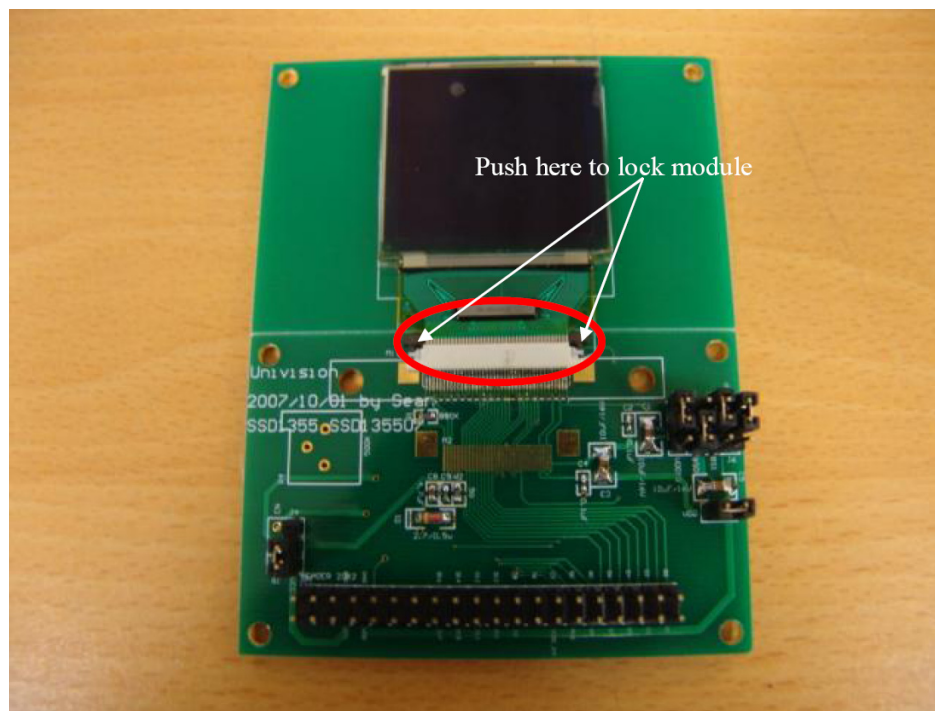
the DD-128128FC-5B and EVK assembled (Top view)
